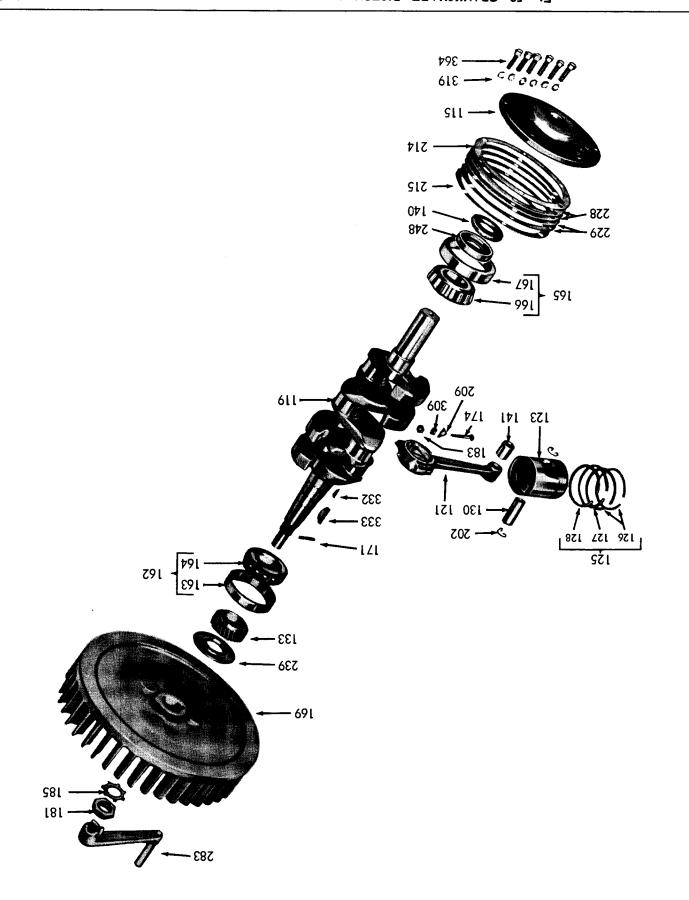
, EXPLODED VIEW OF ENGINE Refer to figure numbers for break down of parts.
